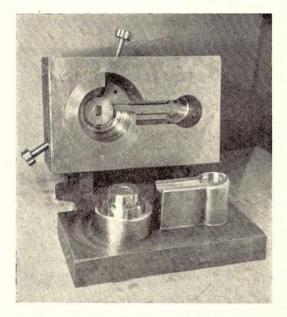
Positive Type Compression Mould for Buttinski.
